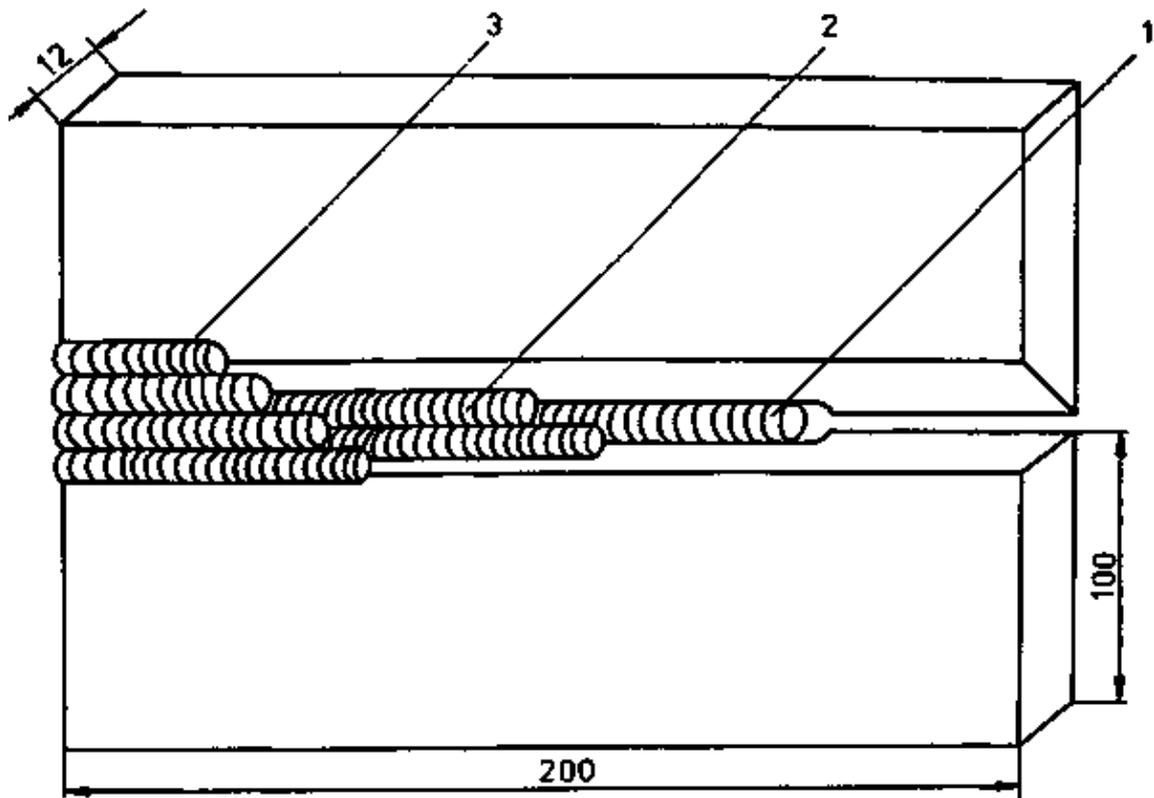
Tacking the V type weld in a roof-like configuration
